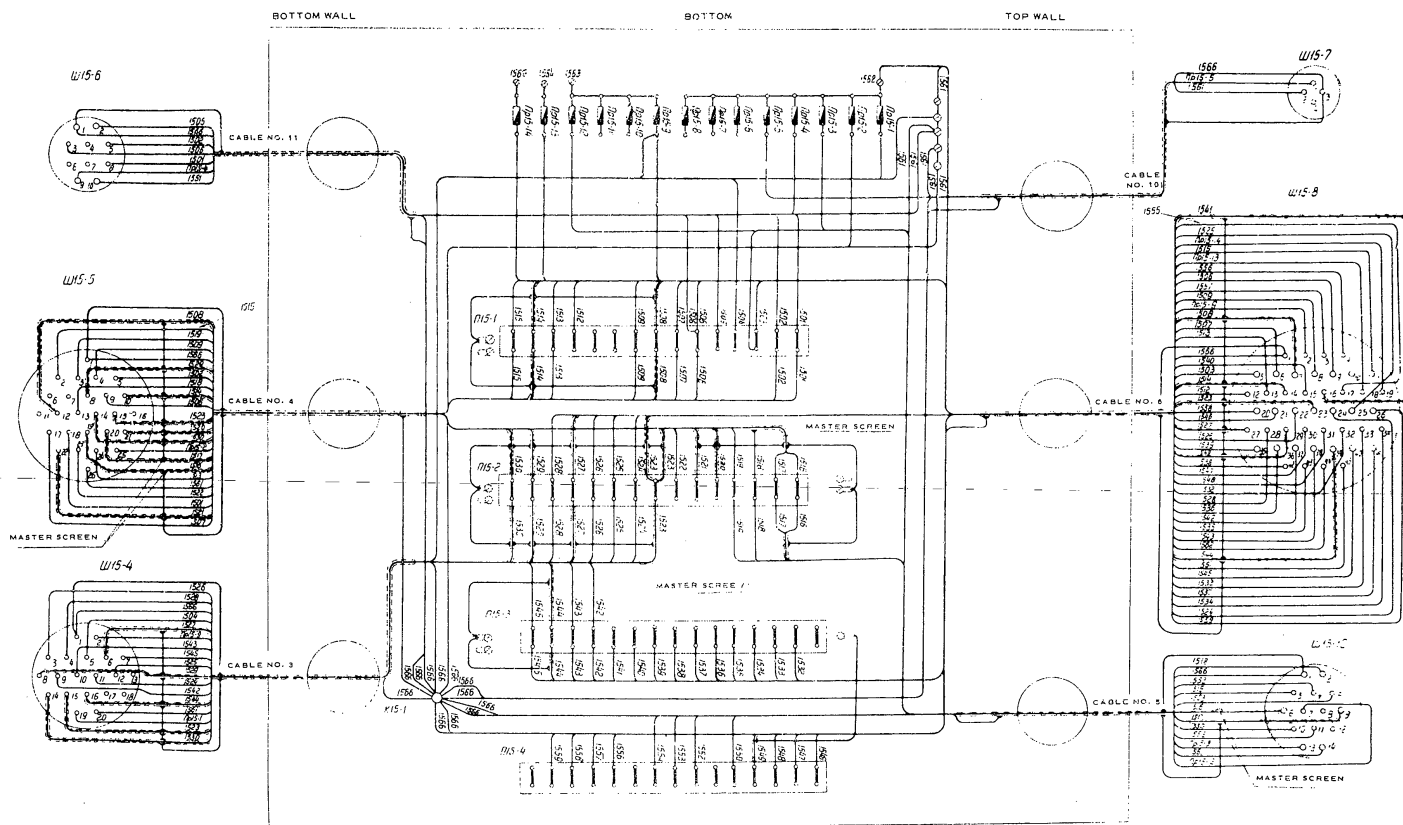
WIRING DIAGRAM OF EXTERNAL CONNECTIONS IN UNIT P15.
